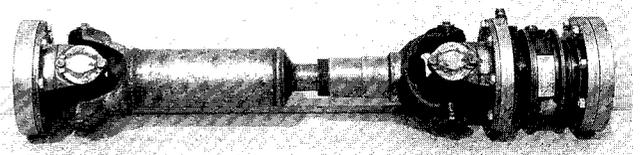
Spicer series 1610 drive shaft with additional adapter flanges on each end to replace a smaller drive shaft.
